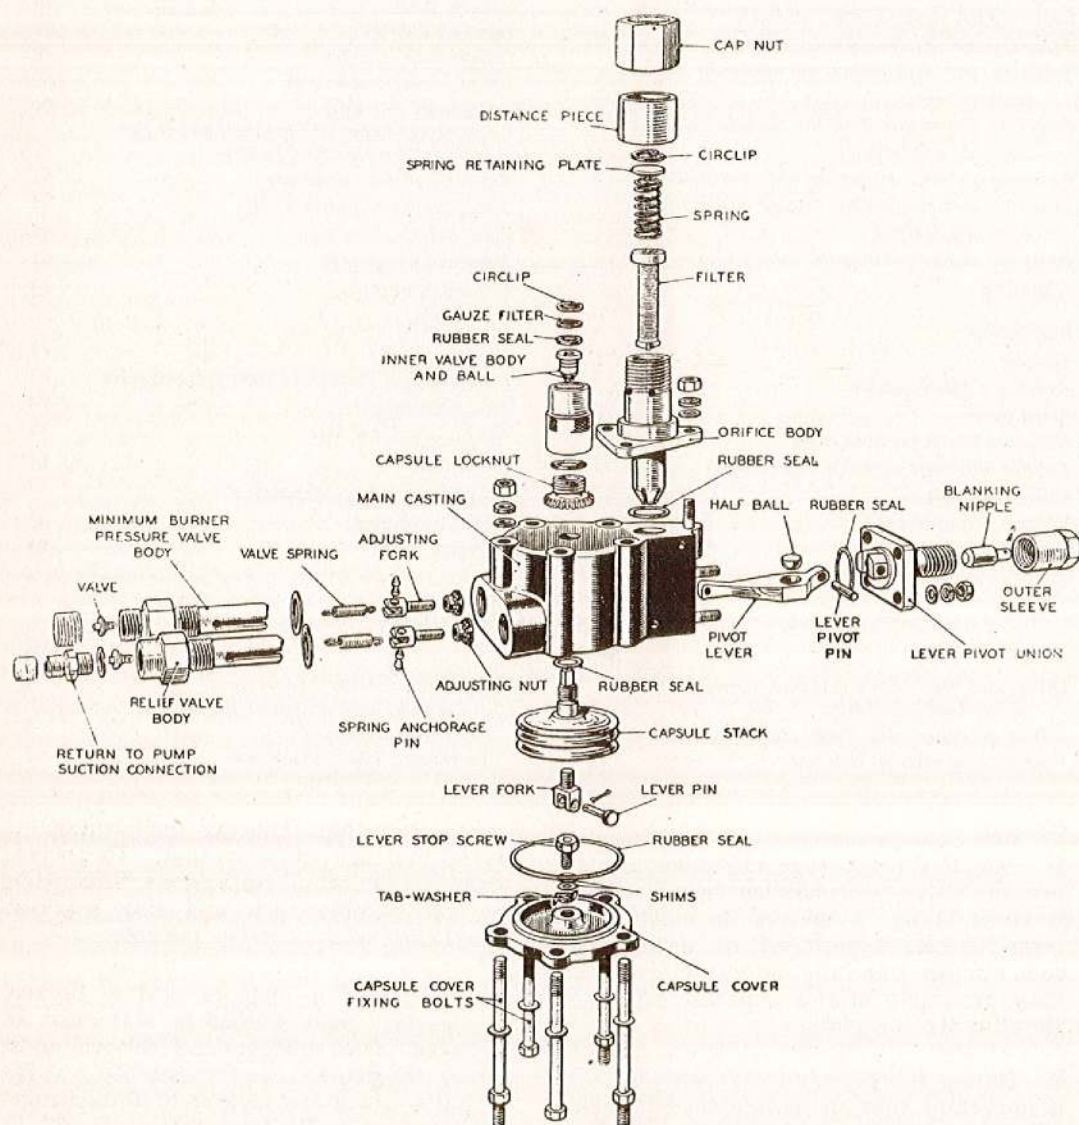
Dismantled view of the minimum burner pressure valve, Type R.V.1/I.A
